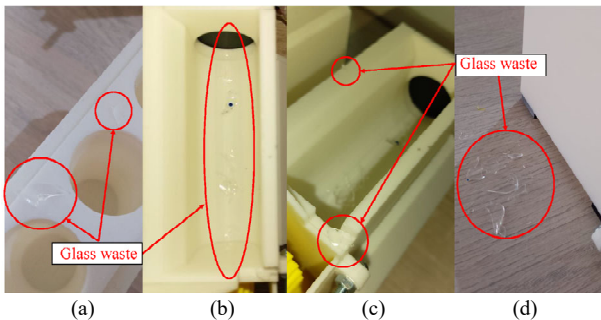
Glass fragments in (a) adapter; (b) waste cavity; (c) structure edges; and (d) machine exterior.
